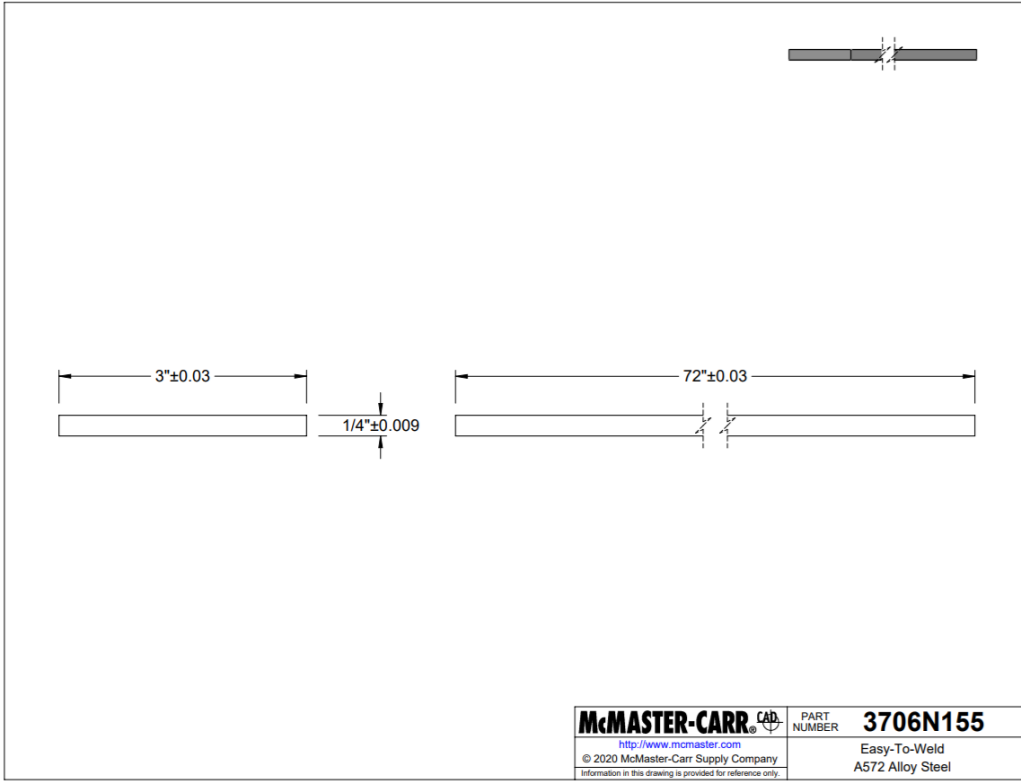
Drawing of Holding Plate on Mid Section Provided by McMaster-Carr
